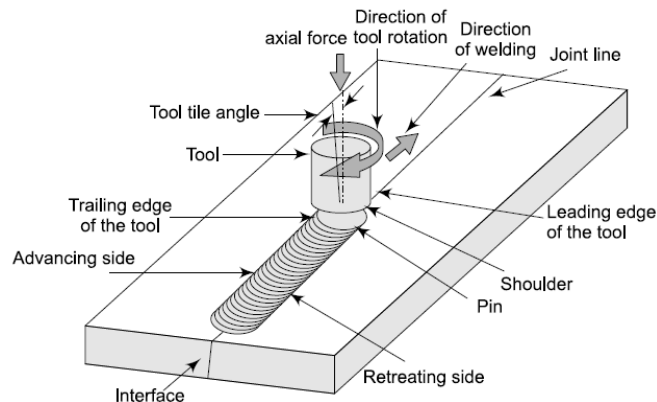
1 : Schematic drawing of Friction Stir Welding (Kumar & Kailas, 2008)
